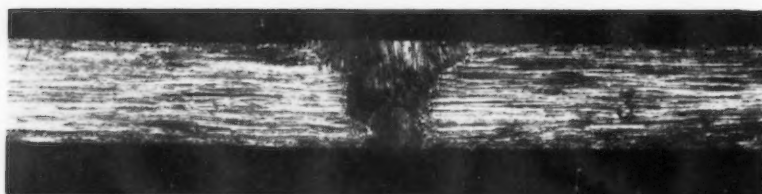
B—Bend test specimens of low-carbon, 13 per cent chromium welds (C 0.07 max.). Welded with 16 per cent chromium electrodes
